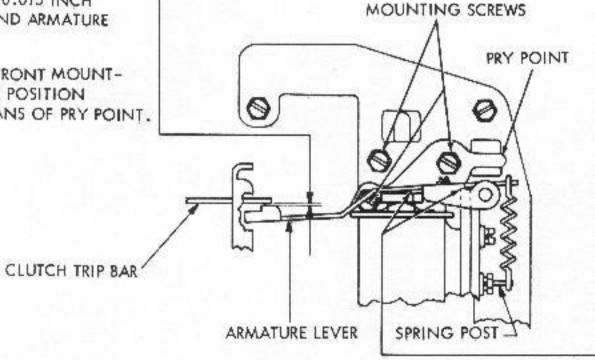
, SYNCHRONOUS PULSE MECHANISM
